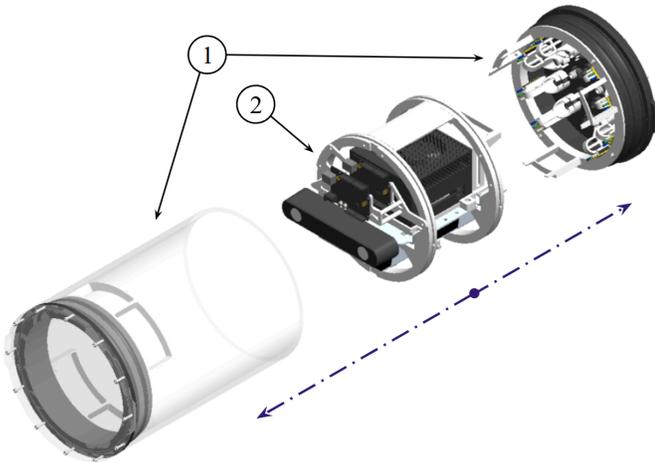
CAD of Kelpie’s hull subassembly, showing the pressure vessel (1) and the mounting rack for the onboard electronics (2).
